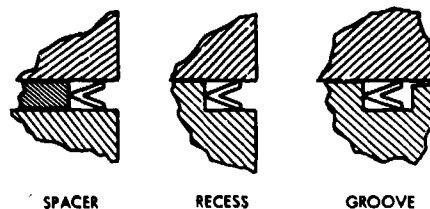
Gland Design for Limiting Initial Seal Deflection
